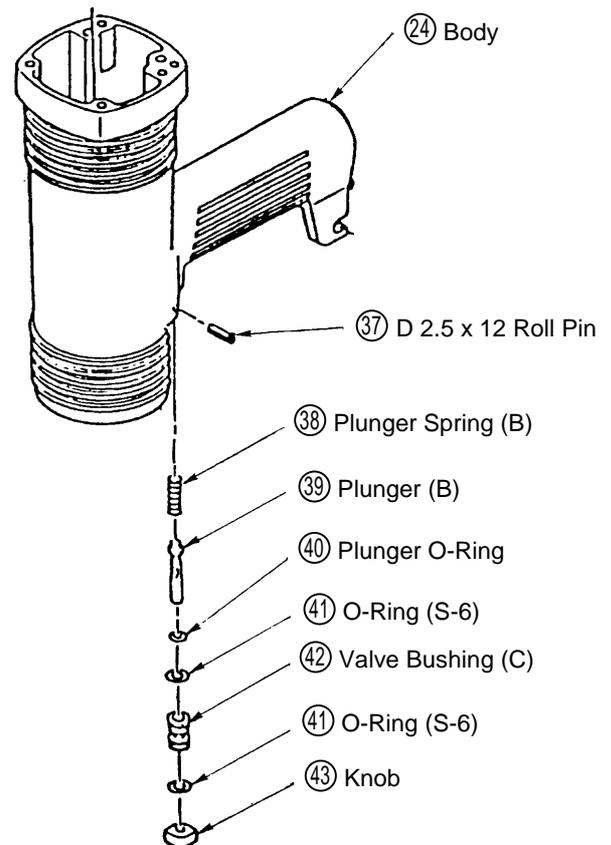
Disassembly and Reassembly of Valve Bushing (C) and related parts
